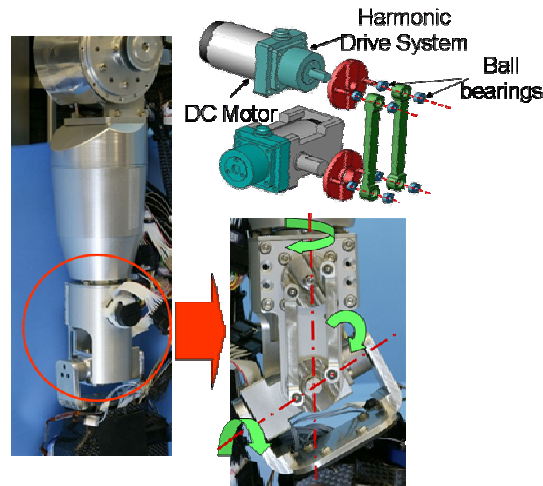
Detailed view of the wrist Mechanism of WE-4R
